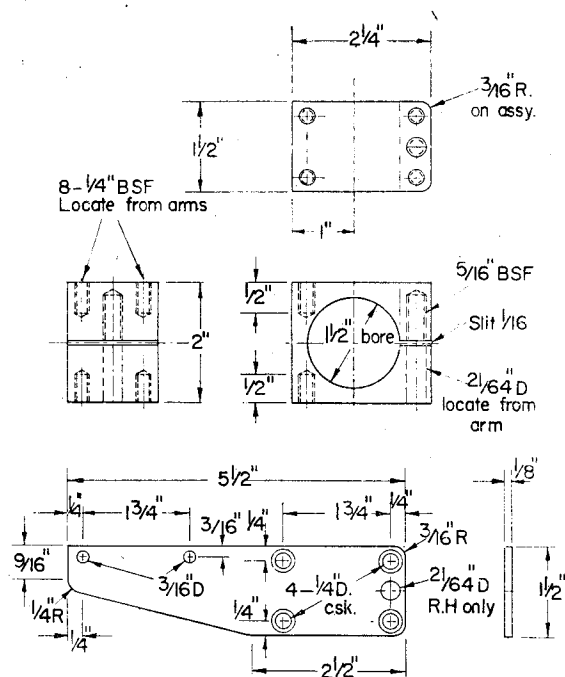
Worktable clamp block (top) and the arms or bracket pieces. First drill all holes tapping size for transferring
